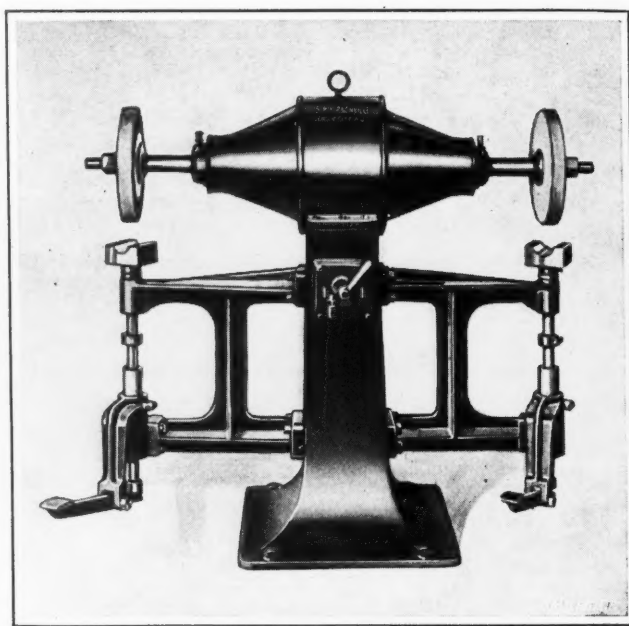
Machine for grinding off Ridge produced in Welding
